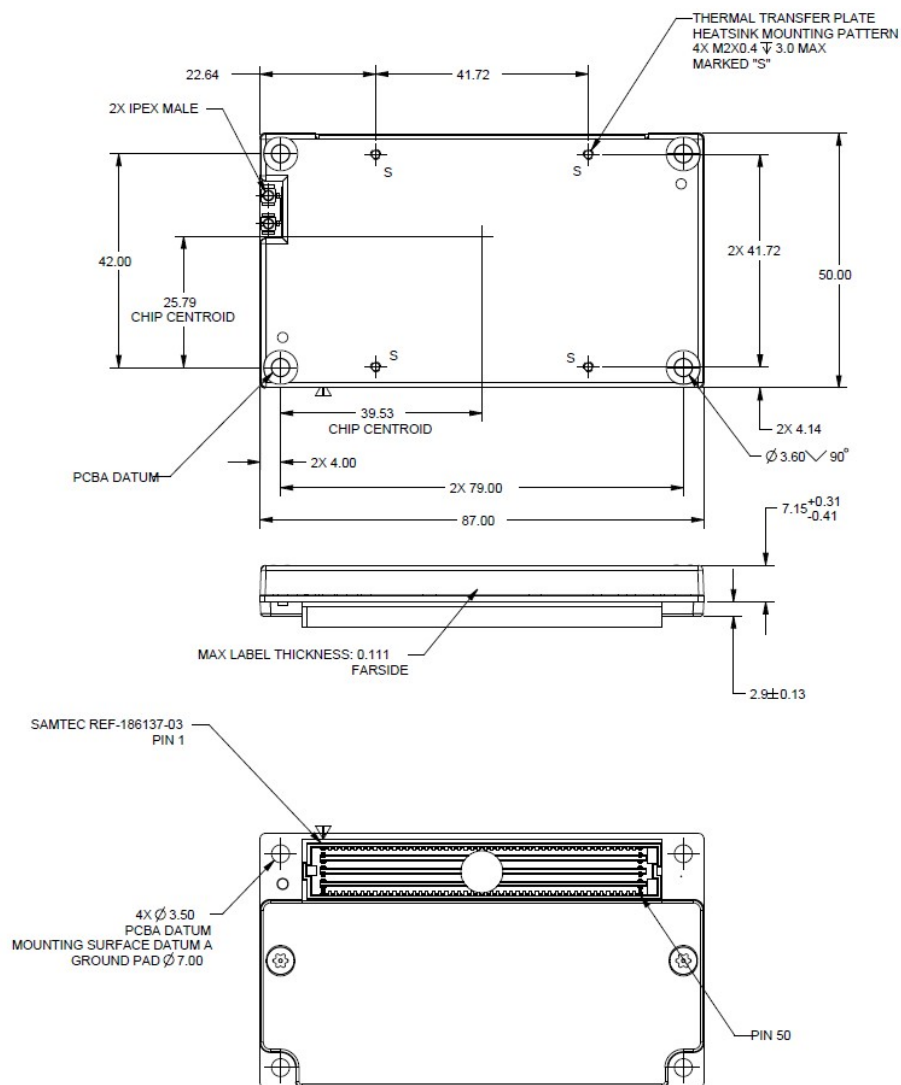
Jetson TX2 Module Package Outline with Dimensions
